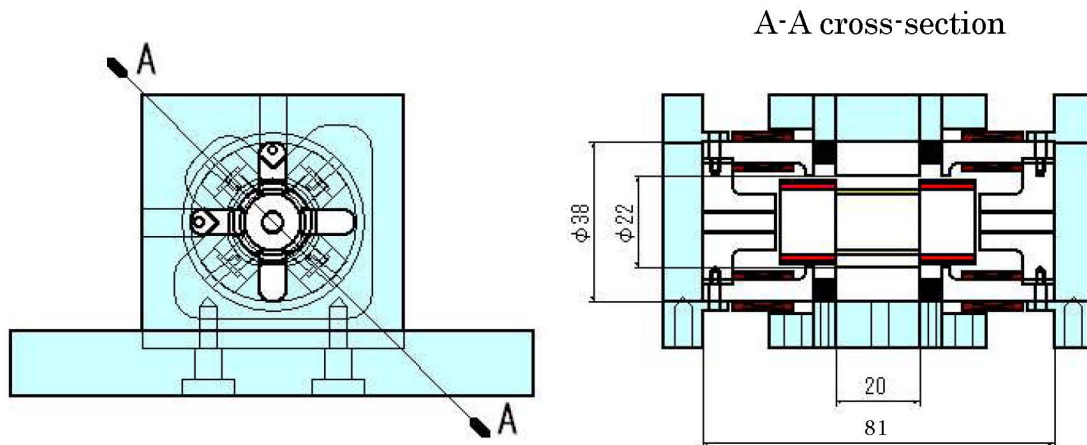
Magnetic bearing and motor system for maglev axial flow pump
